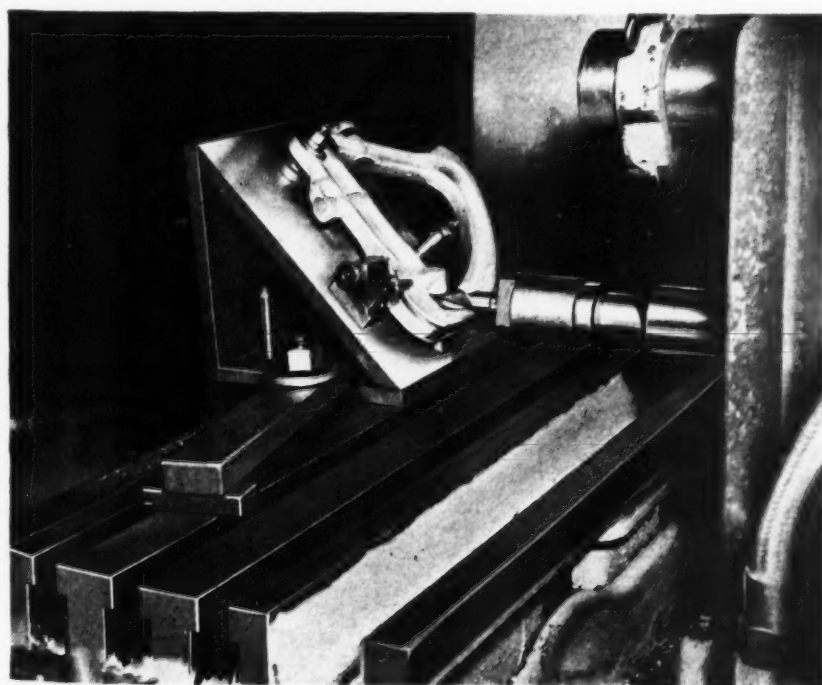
Set-up Employed on a Milling Machine for Machining Inner and Outer Surfaces of Bosses on an Odd-shaped Casting
